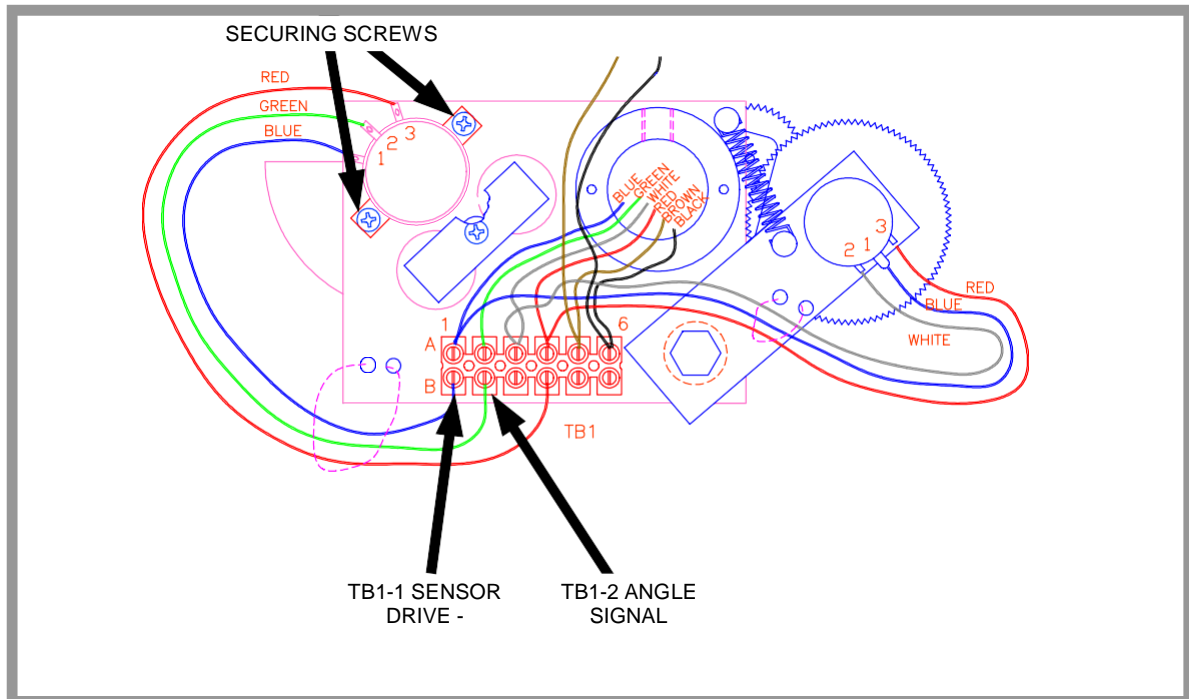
SENSOR BASEPLATE ASSEMBLY WIRING
